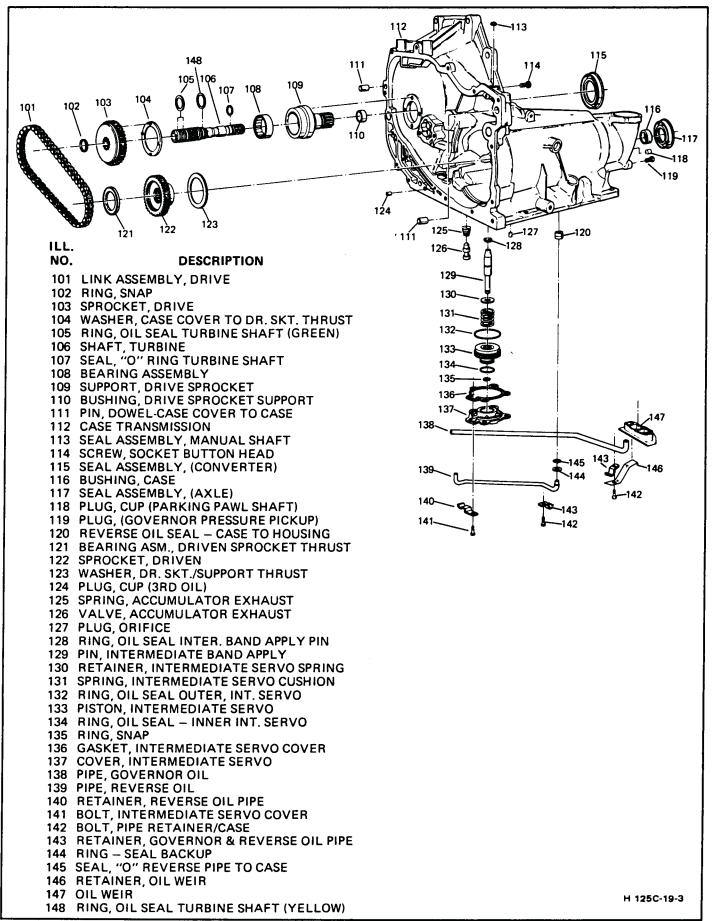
Drive Link Assembly, Servo, Oil Pipes
